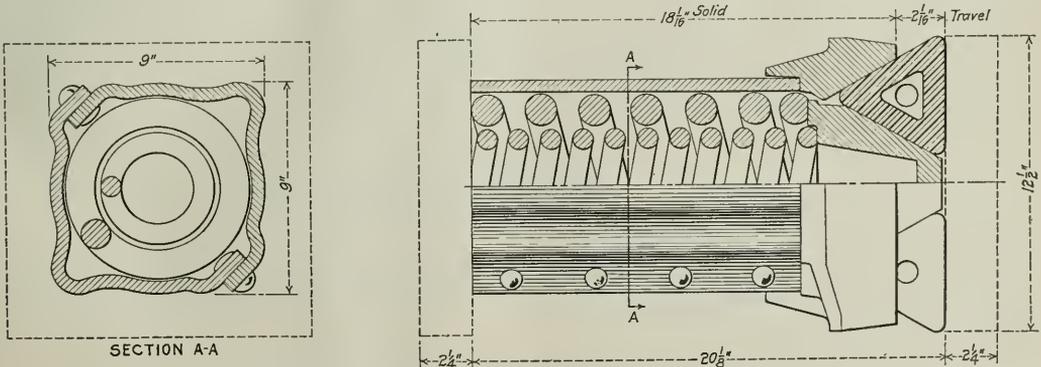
Sessions-Standard Friction Draft Gear, Type KD
